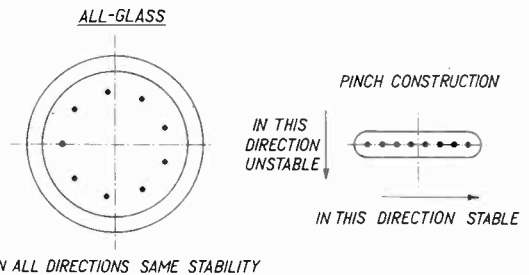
Transversal section of a pinch and an all-glass bottom showing stability of the valve assembly and distance of the lead-out wires.
